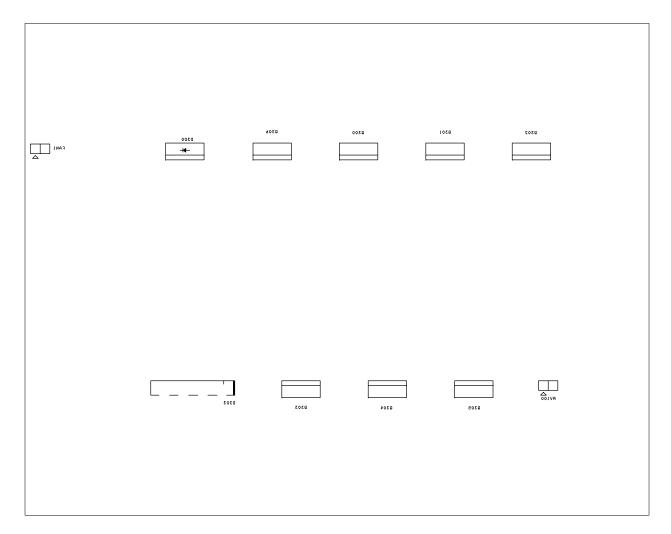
Power Stage Board Silkscreen Bottom Layer
